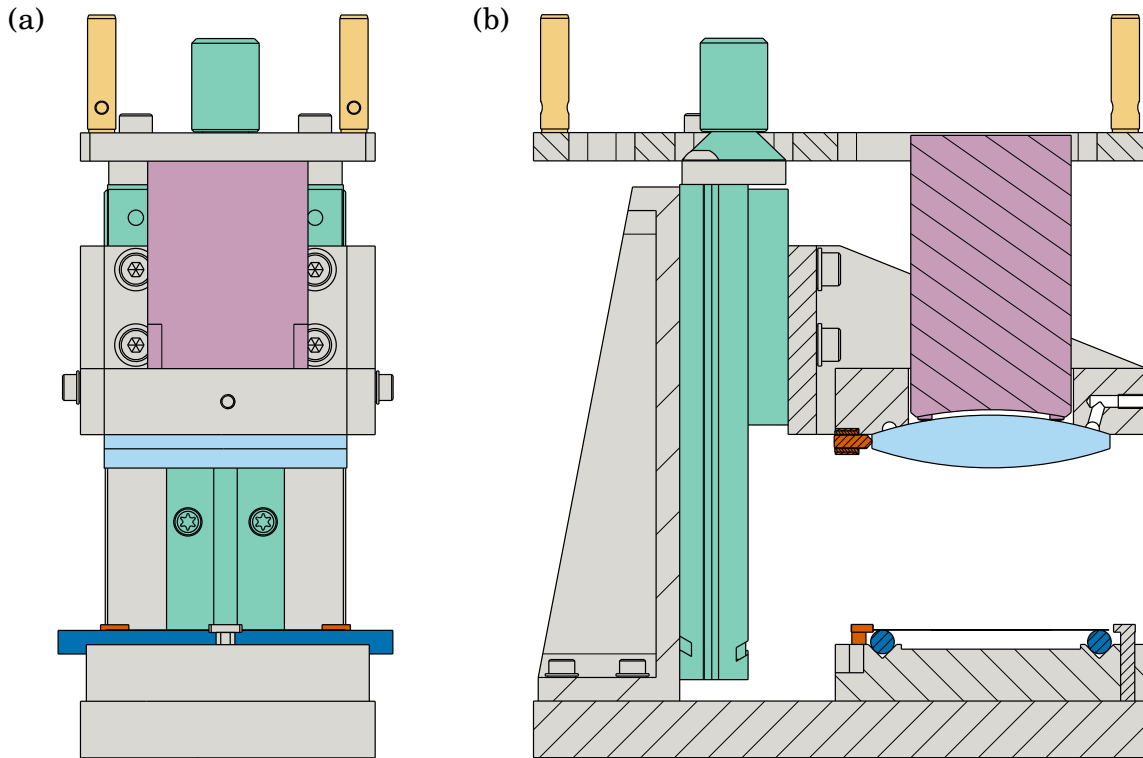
(a) Drawing (front face) and (b) cross-sectional drawing (side face) of the tool that allows direct bonding of a bi-convex cylinder lens with a thin wafer that has a diffraction grating inscribed in its outer surface. Procedure: The tool is turned upside down so that it stands on the pillars (yellow). Then, the lens (light blue) is placed on a ring-shaped vacuum chuck. There is no mechanical contact to its optical aperture. The lens' position is fully determined by the chuck's shape and an alignment pin (orange). Then, the tool is turned around to its original position, and the wafer is placed on top of two test pins (dark blue). The wafer's DOE is facing downwards. The wafer's position is fully determined by these two test pins and by two alignment pins (orange). The lens is now descended via a dovetail slide (green) until an initial line contact sets in. By further descending the lens, the contact front increases symmetrically. As soon as the lens' movement is stopped by the test pins, a weight (purple) is put on top of the lens. Now, the vacuum is switched off, the tool is placed in a furnace and the dovetail slide is elevated. After annealing, the weight is removed and the hybrid lens is taken out.
